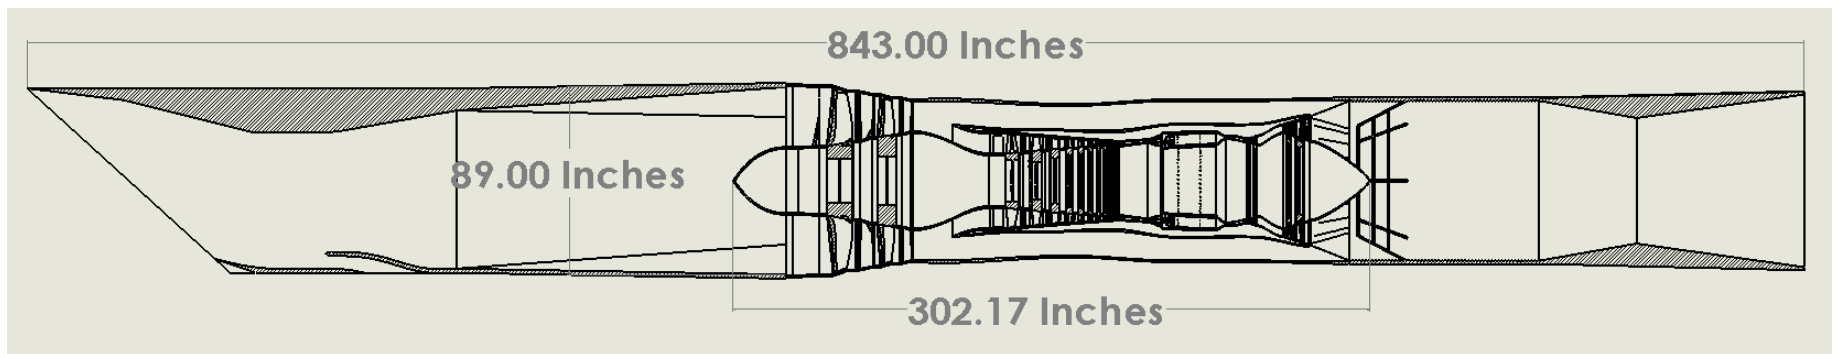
CE18-Bullet Drawing with Major Dimensions
